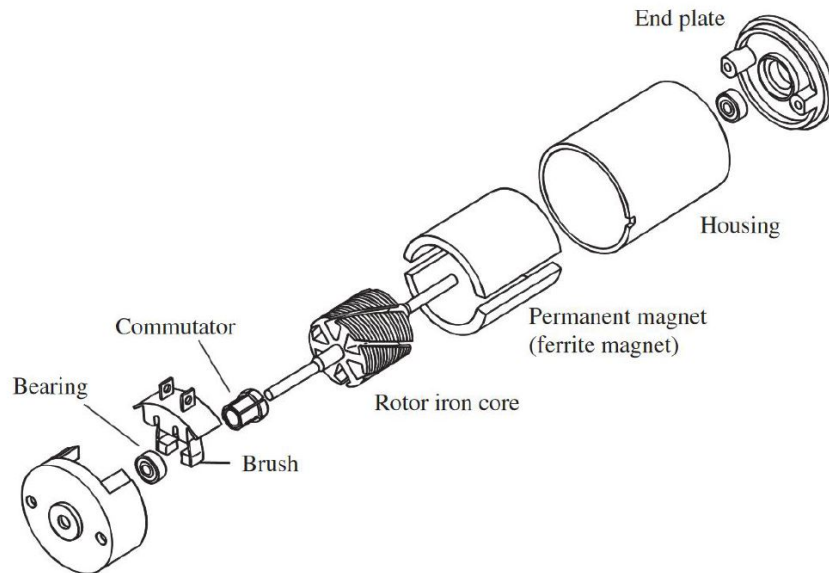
Exploded view of an external permanent magnet brushed DC motor, from [55].
